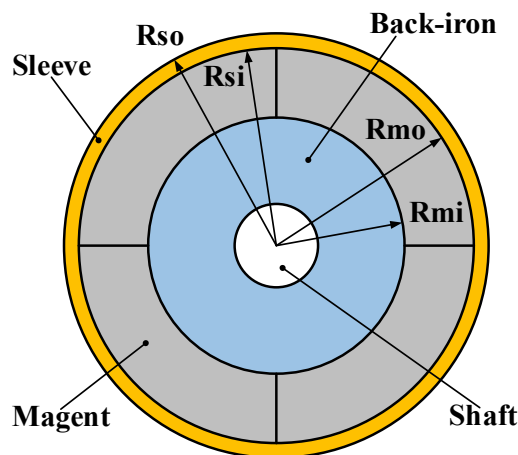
Cross-section of a typical 4-pole high-speed PM machine rotor.
